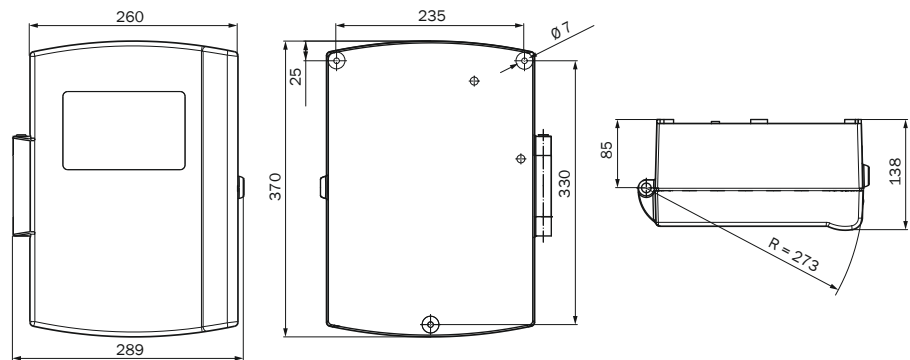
Fitting the control unit AWE (sheet steel enclosure version), dimensions in mm
